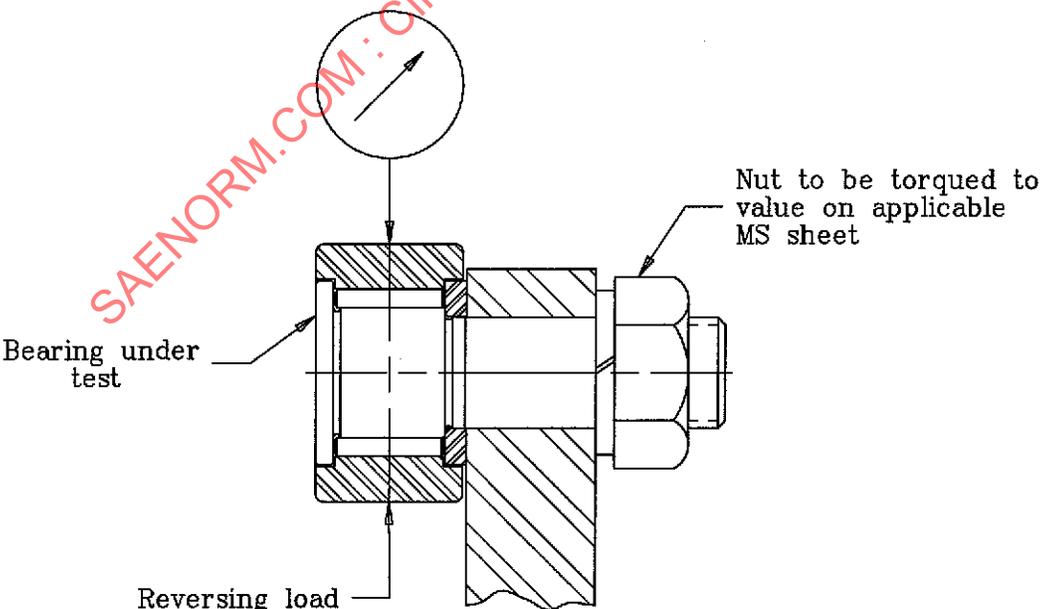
D - Radial Internal Clearance and Radial Runout Test for Type VII, VIII, and IX Bearings
